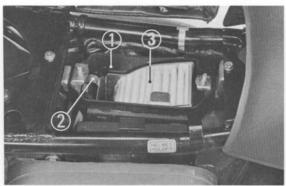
① Air cleaner case ② Retaining clip ③ Air cleaner element
